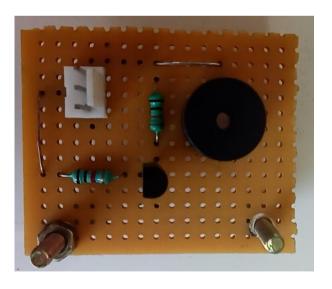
BUZZER UNIT ON PCB BOARD
